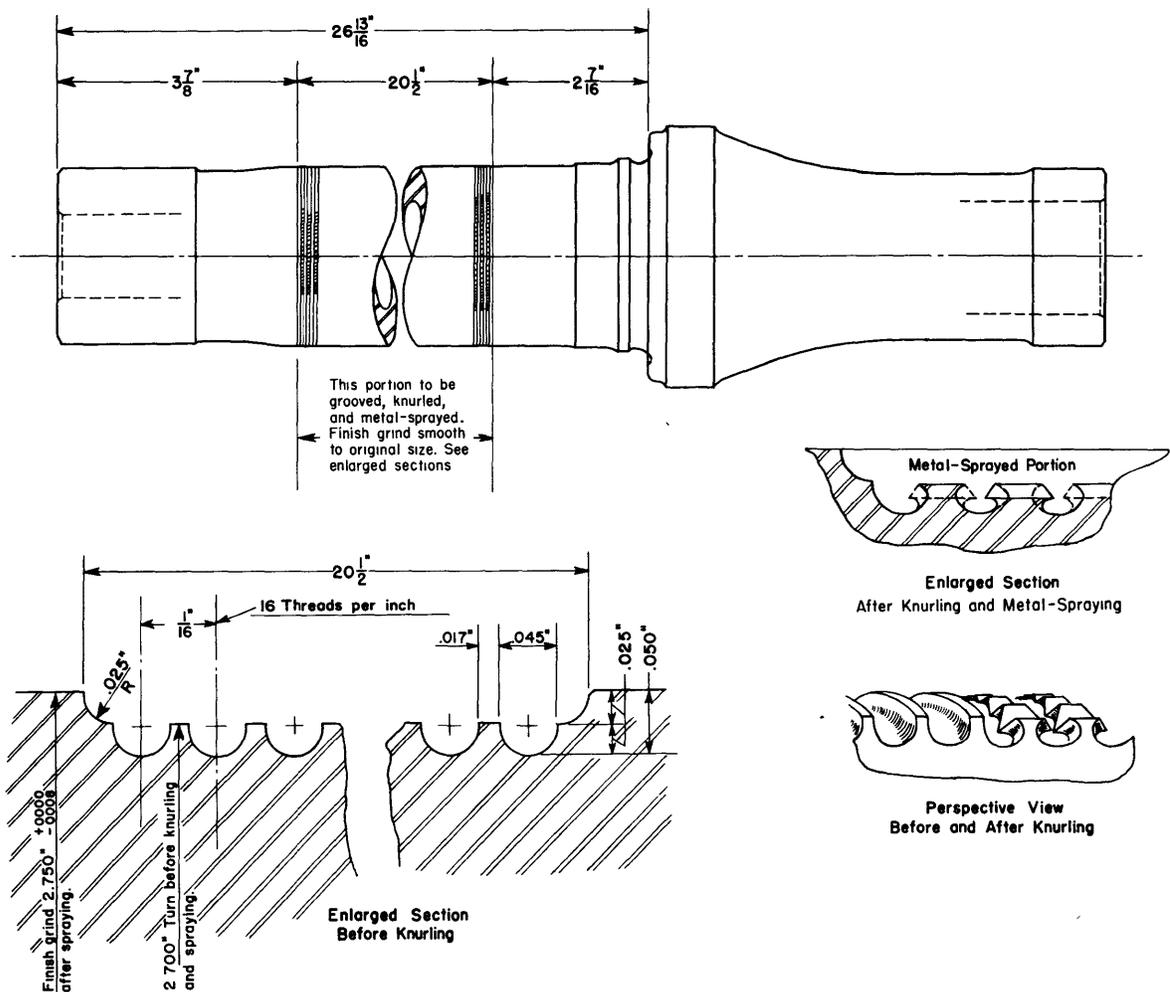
Sketch showing Preparation and Details of Metal-Coated Rods
